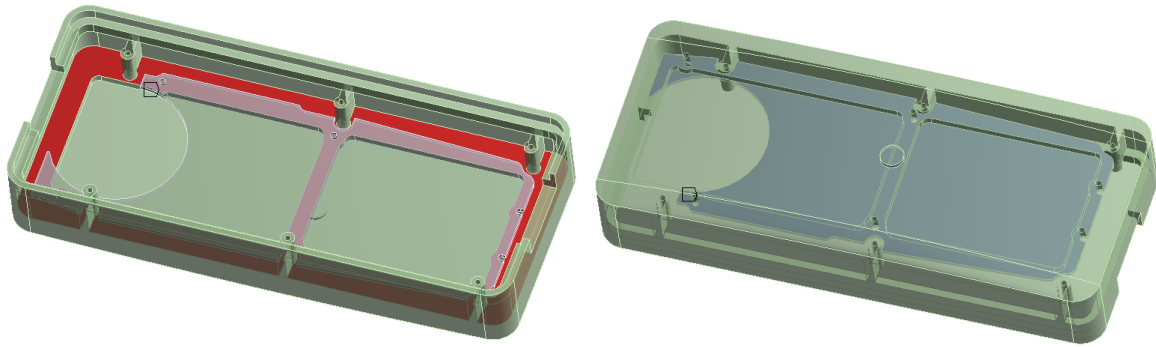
Example of a frictionless face to face contact condition, in this case between the faces of the front panel (red) and the underside of the MMI board (blue)
